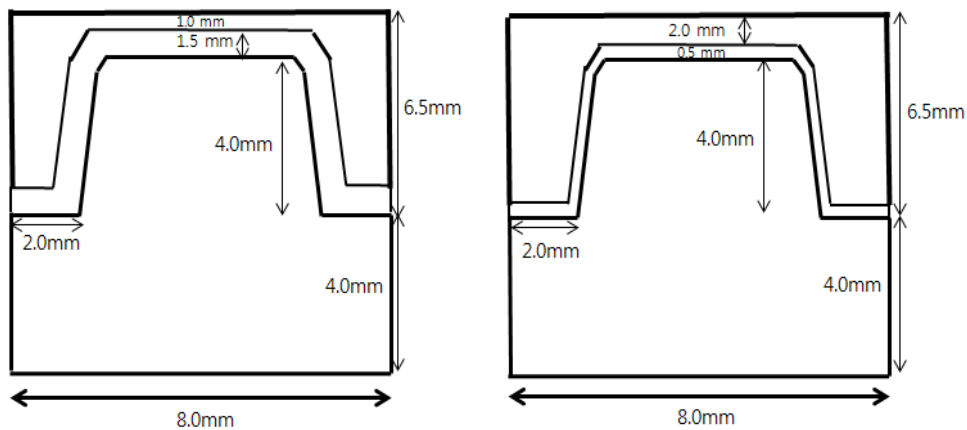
The dimensions of specimens with (left) the thick (1.5-mm) coping and (right) the thin (0.5-mm) coping.
